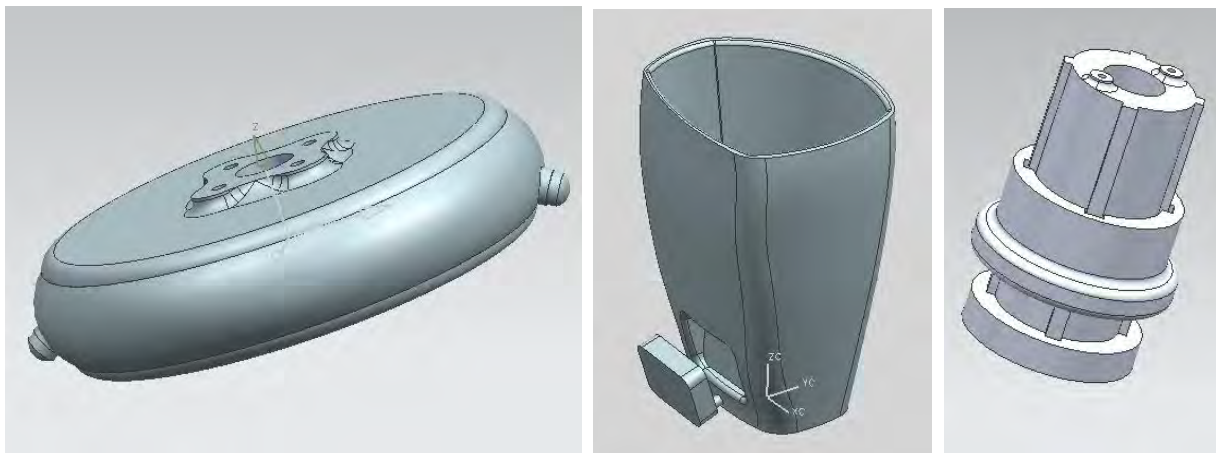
Initial designs: Mech. AK pump (left), Hybrid AK pump (center), Mech. BK pump (right)
